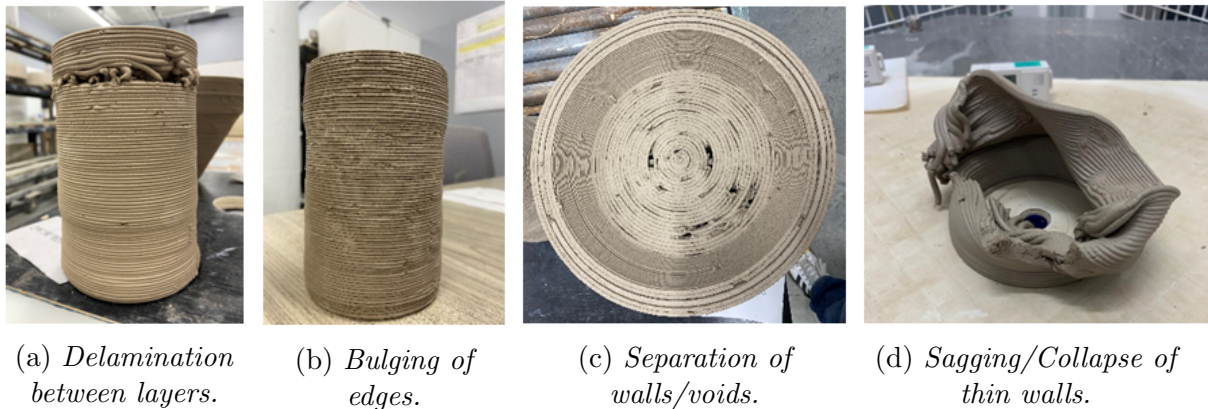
Typical failures in clay 3D printed parts.
